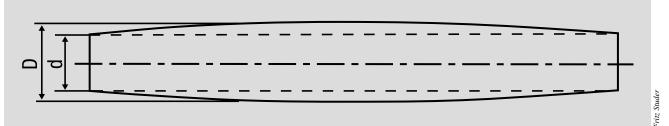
Workpiece after grinding without a steady rest shows a larger diameter in the middle than on the ends.
